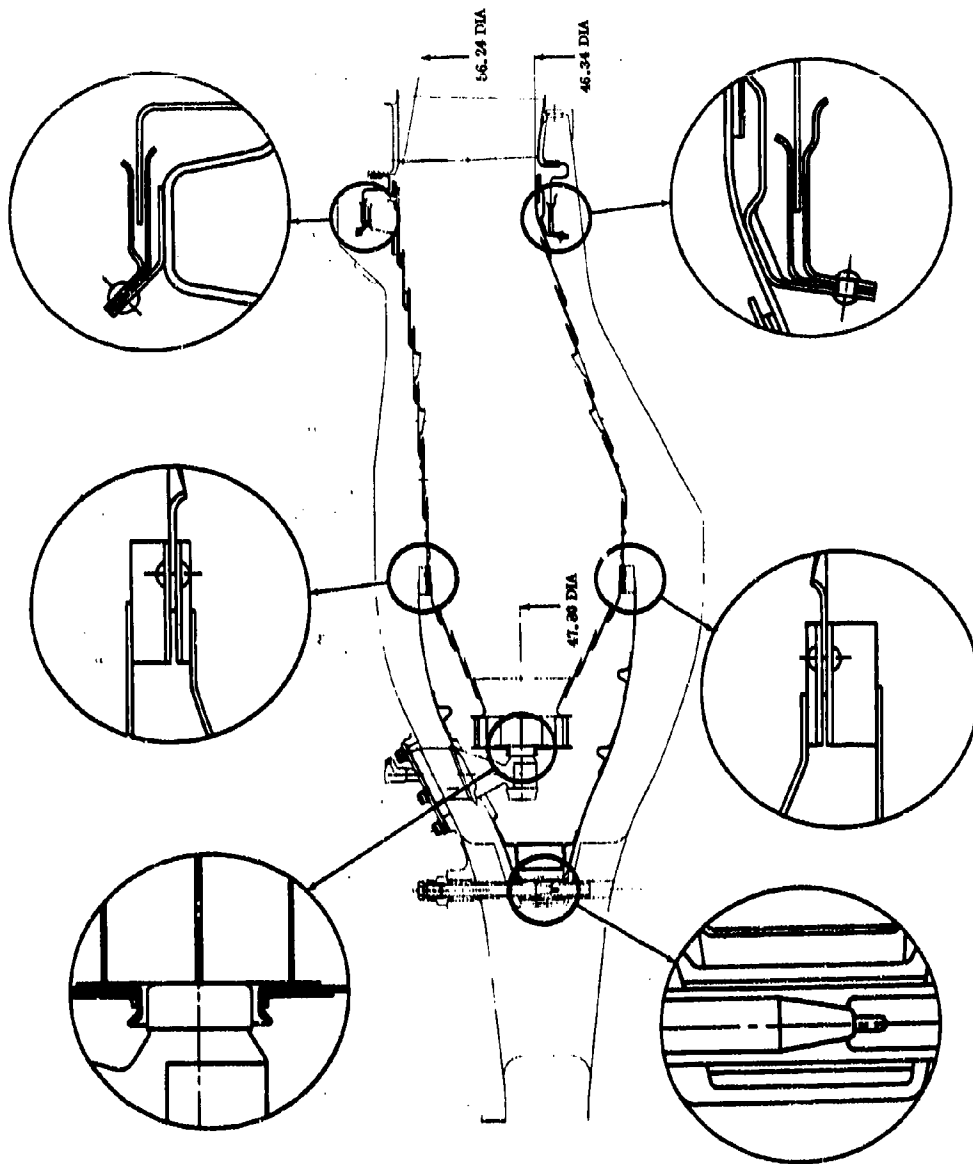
GE4 COMBUSTOR ASSEMBLY AND COMPONENTS
